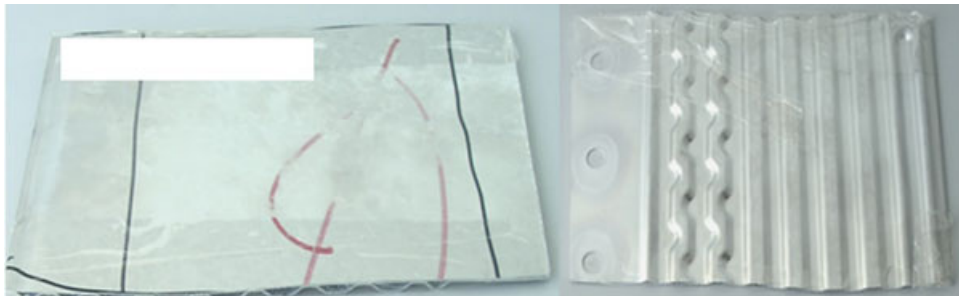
Cut out from a large cooler plate with slightly bulged surface
